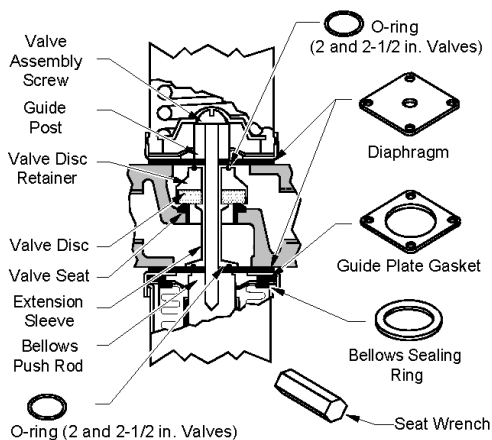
246, 247, 2 in., and 2-1/2 in. Valves
